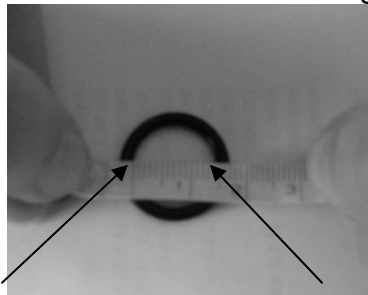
Measurement of the inside diameter of an O-ring. The arrows show where to take the measurements.
